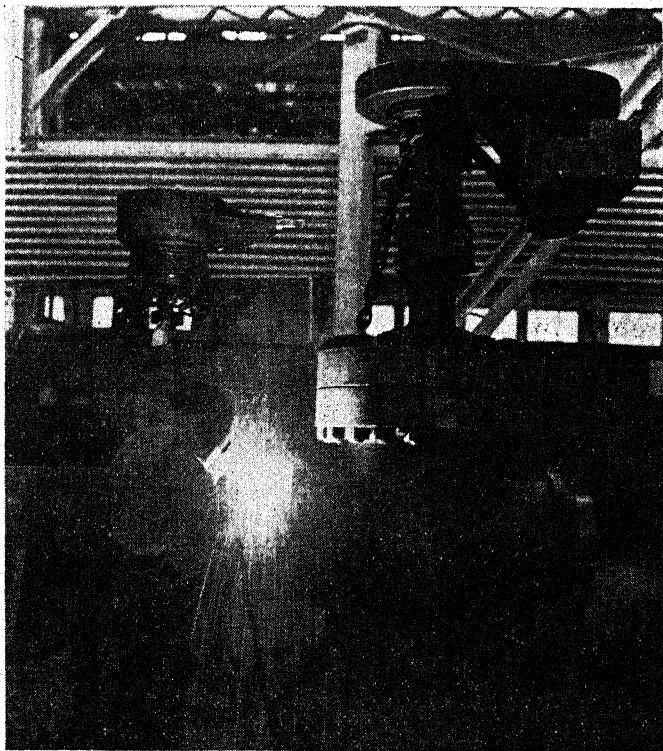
Arc welding a 14-inch, 1500-pound gate valve into header. Note size of bonnet flange.
